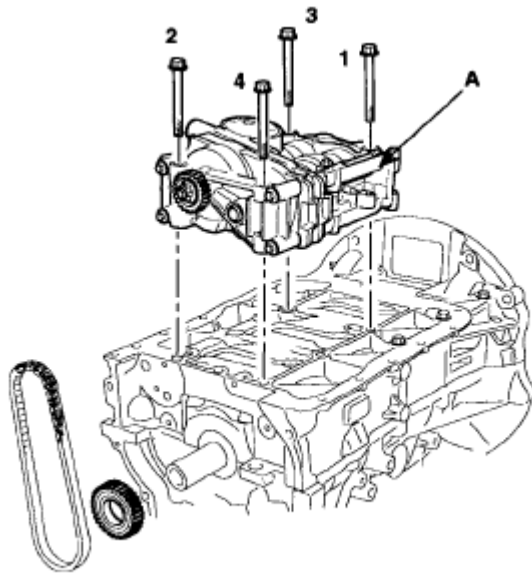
Identifying Balance Shaft Chain And Balance Shaft Module
